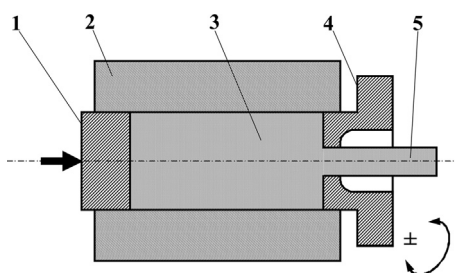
Scheme of direct extrusion of metal by the KOBO method: 1—punch, 2—container, 3—billet, 4—reversibly rotating die, 5—product.
